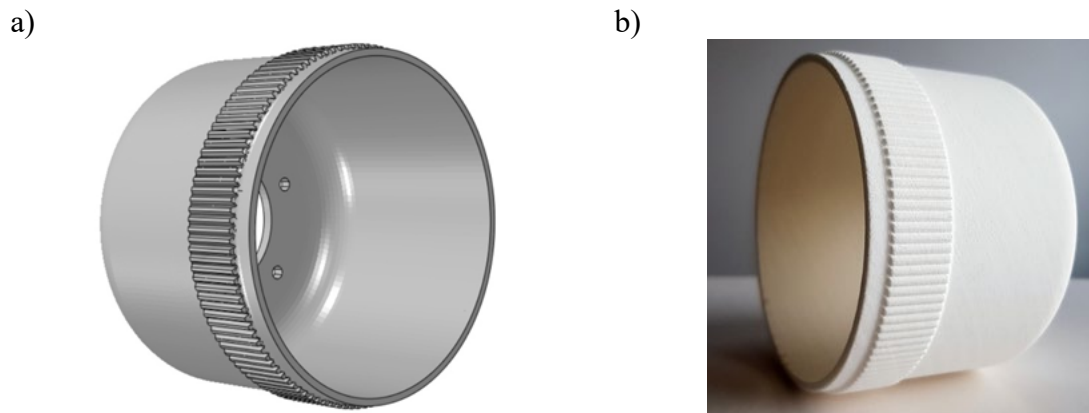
Standard flexspline of harmonic drive: a) numerical CAD model, b) prototype made by additive method
